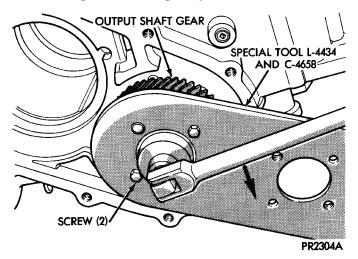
Tighten Output Shaft Retaining Nut to 271 N·m (200 ft. lbs.)
